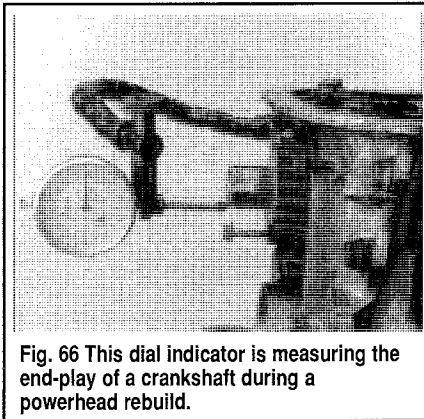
This dial indicator is measuring the end-play of a crankshaft during a powerhead rebuild.
